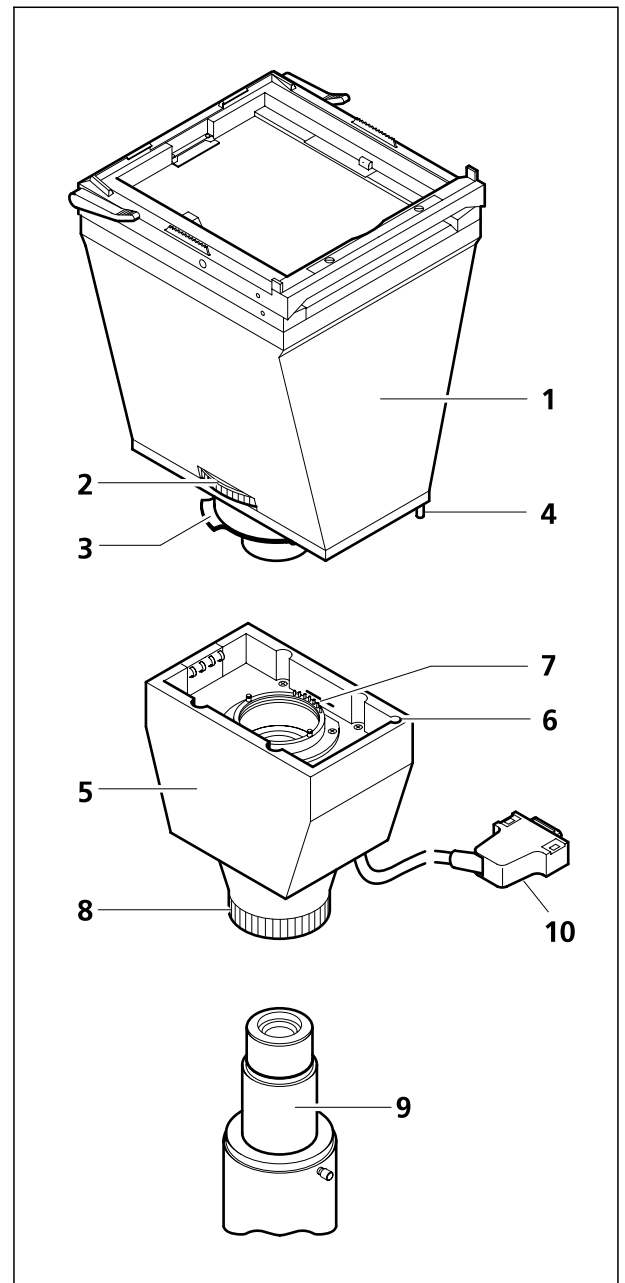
Attaching the camera body and the M 4 × 5" large-frame camera attachment
